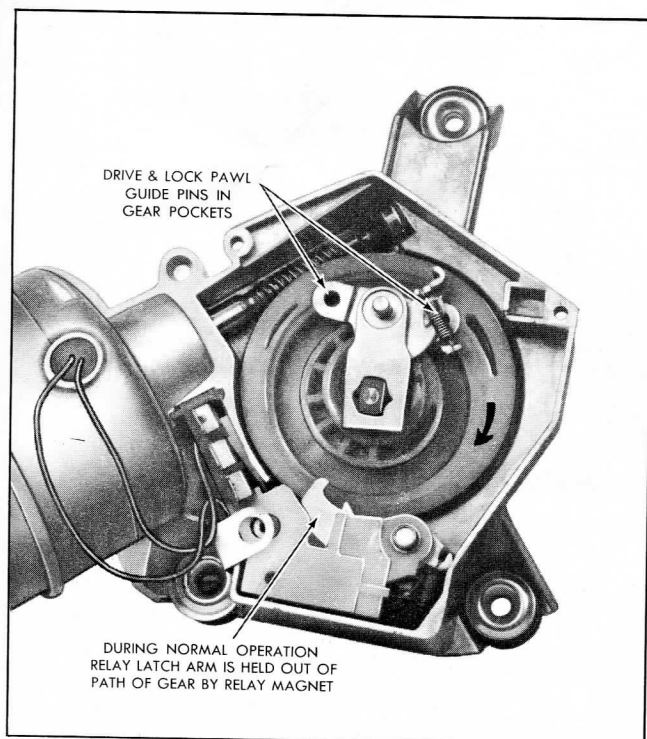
Guide Pins in Drive Gear Pockets on Pontiac and Optional Tempest
